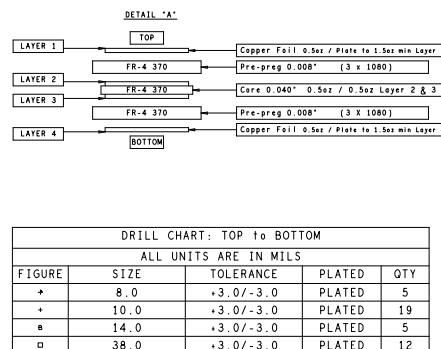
SMP-TPS61200-MVK Fabrication Drawing
